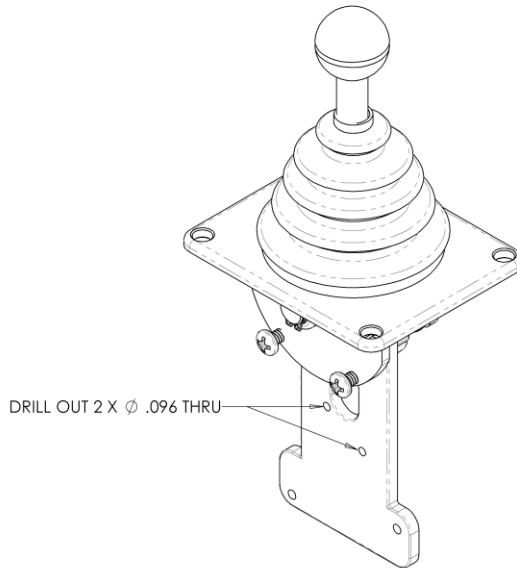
Diagram showing holes to be drilled out for new microswitch bracket.
